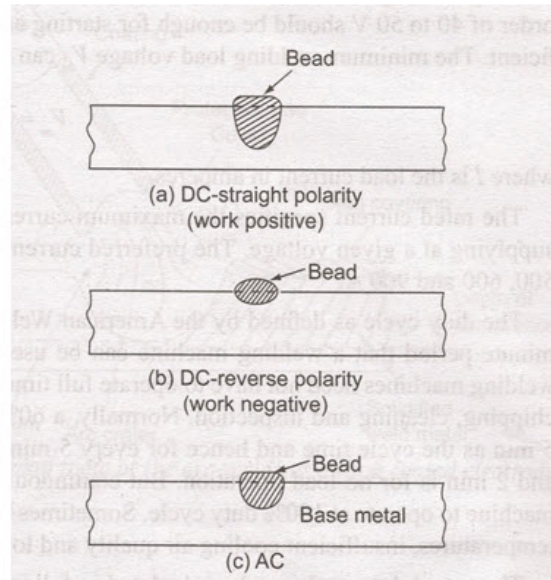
Weld penetration as affected by the polarity of the workpiece
